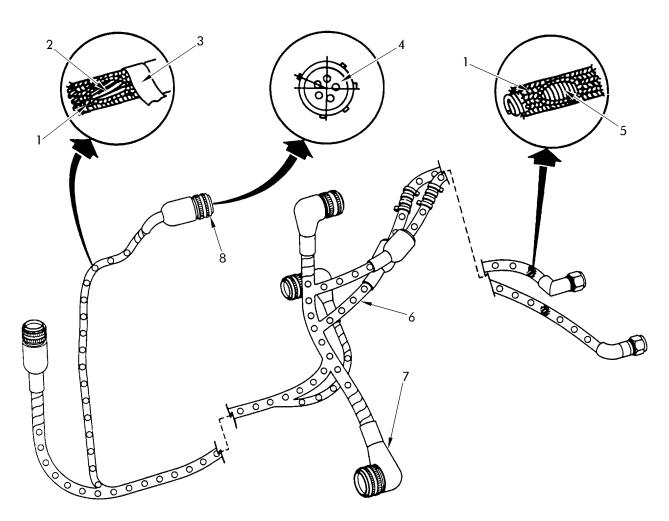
Yellow Electrical Cable; Removal and Installation
